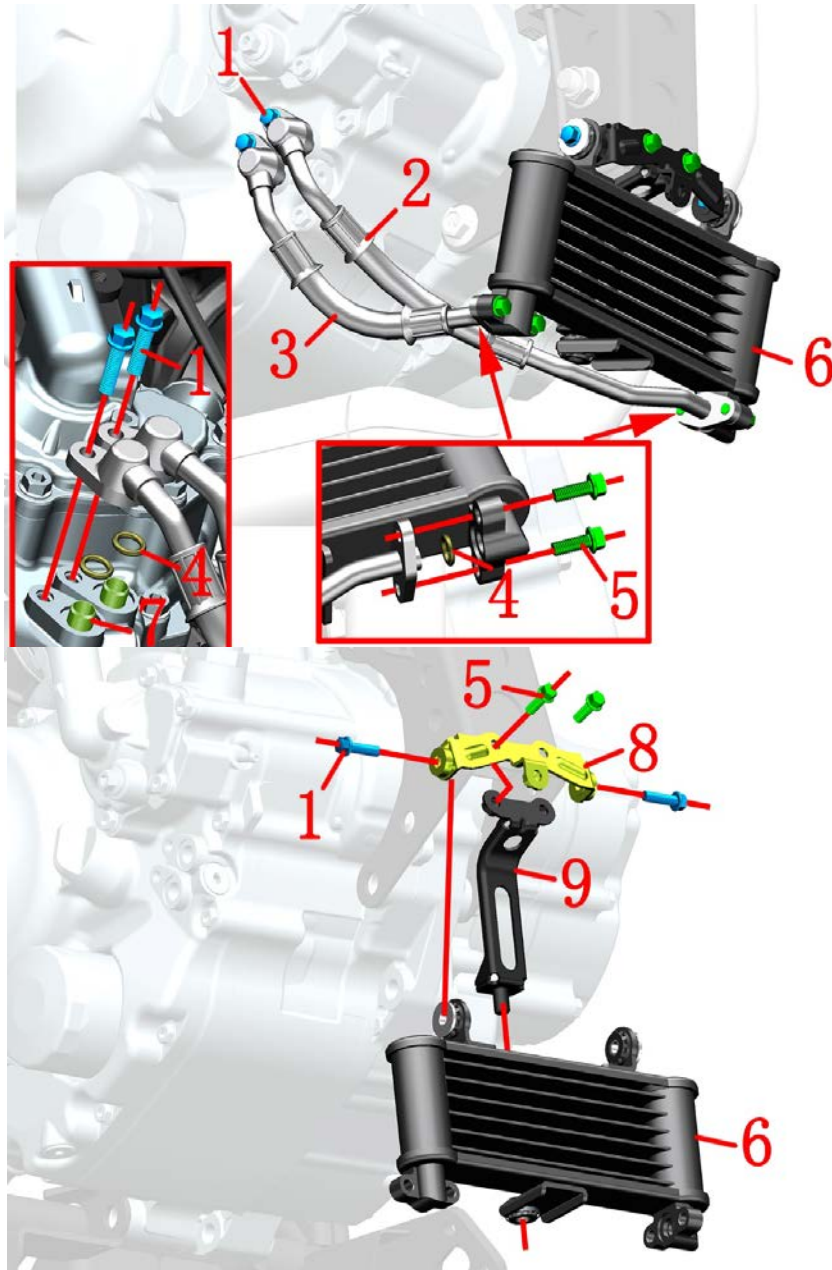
Cooling System Components		Oil Cooler Assembly 1		CAUTION
